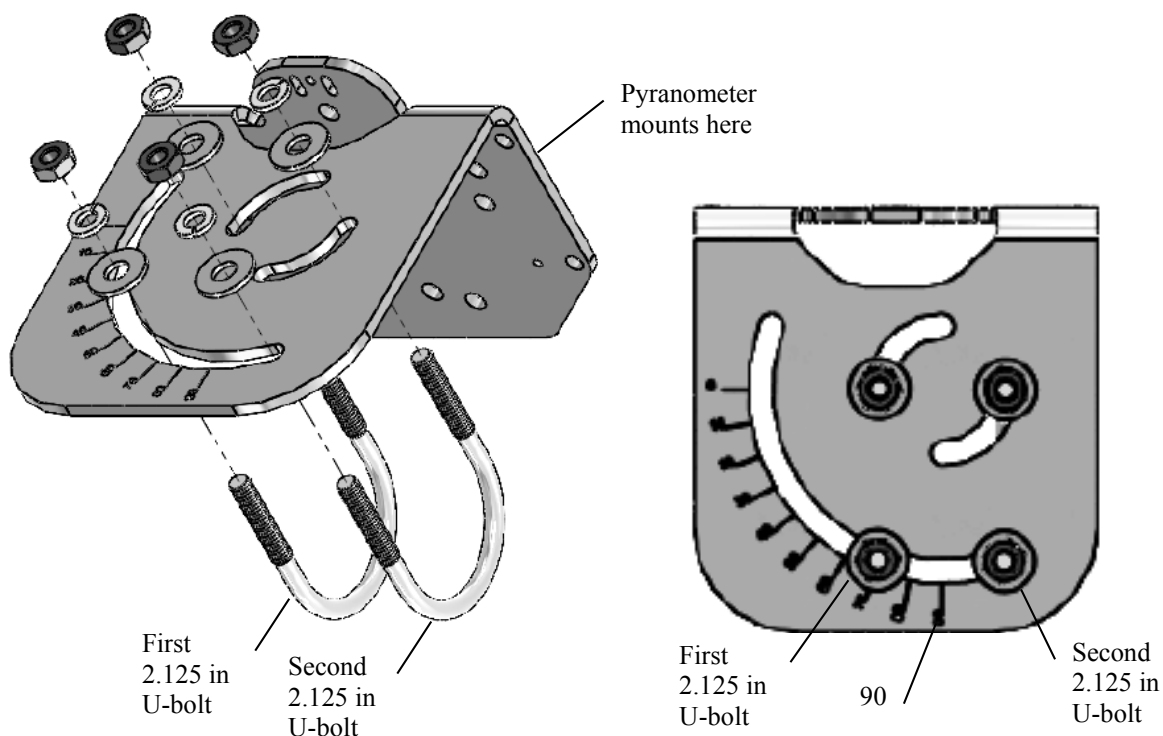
CM245 bracket with 2.125 in. U-bolts positioned to mount the pyranometer horizontally on a crossarm
